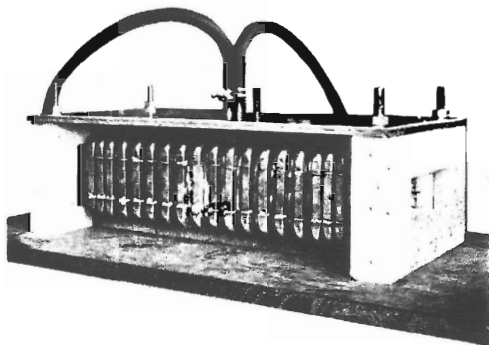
Machine-frequency heating for forging coil. (*Westinghouse Electric Corp.*)
